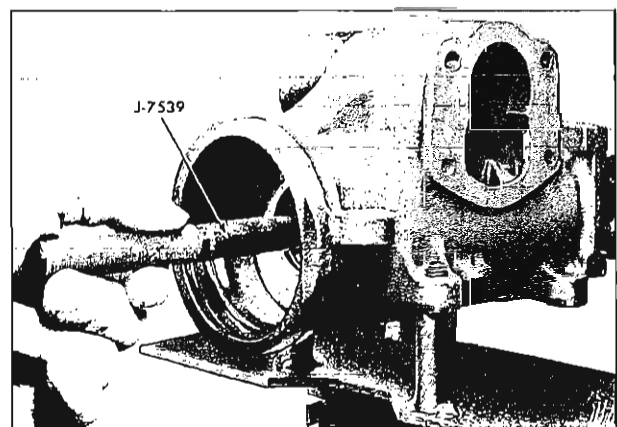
A-9 Arbor J-7539 Against End of Steering Worm
